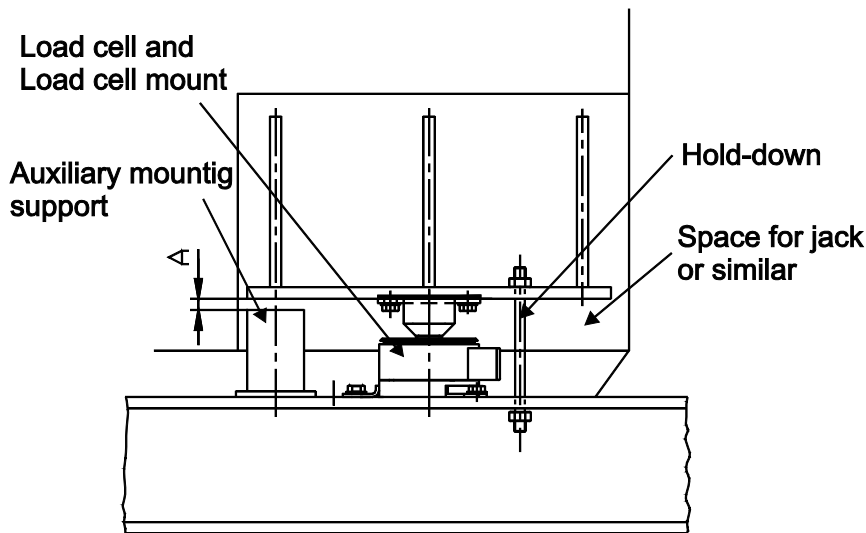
Bunker bracket, arrangement of the assembling aid support structures
